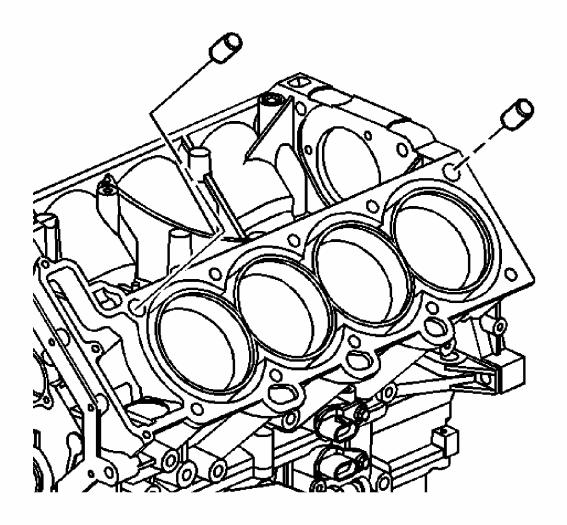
Identifying Cylinder Head Locating Pins Courtesy of GENERAL MOTORS CORP.
